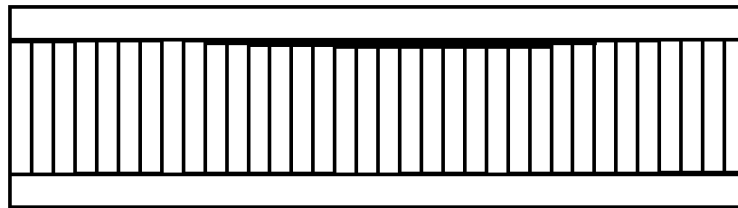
Excess adhesive inbetween the face sheet and honeycomb core.
